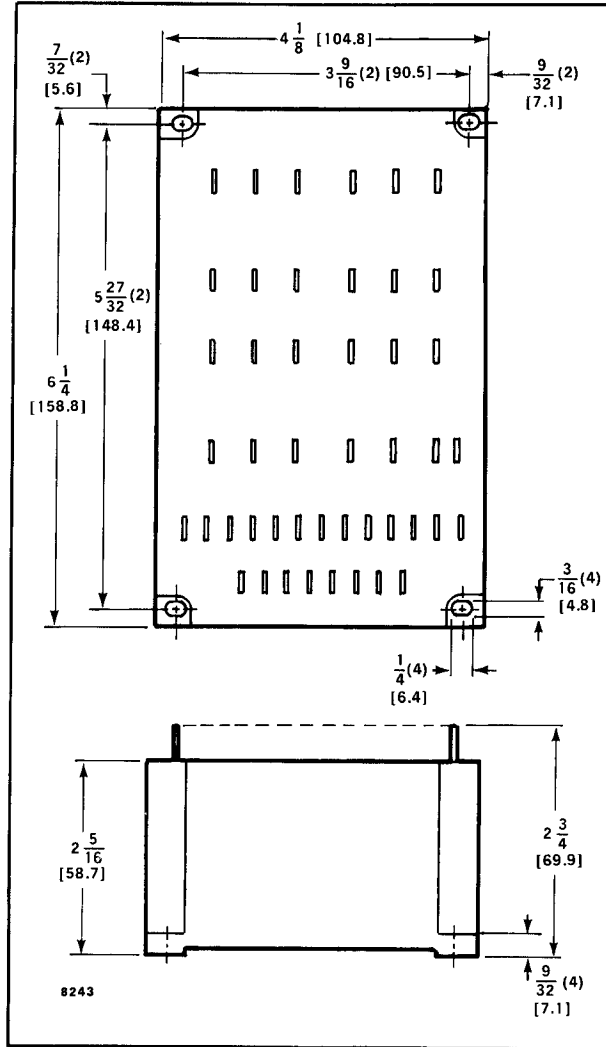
MOUNTING DIMENSIONS FOR W973 IN IN. [mm IN BRACKETS].
